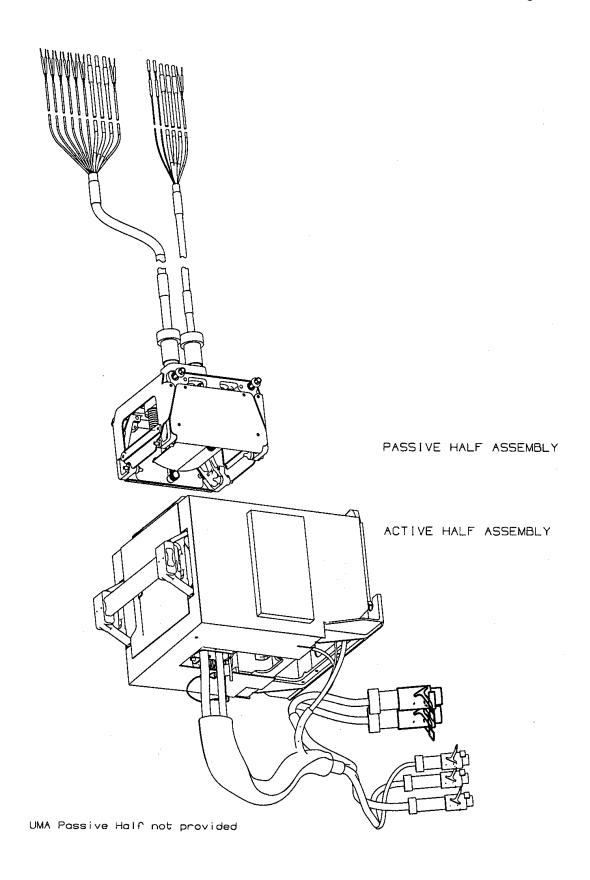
UMBILICAL MECHANISM ASSEMBLY
